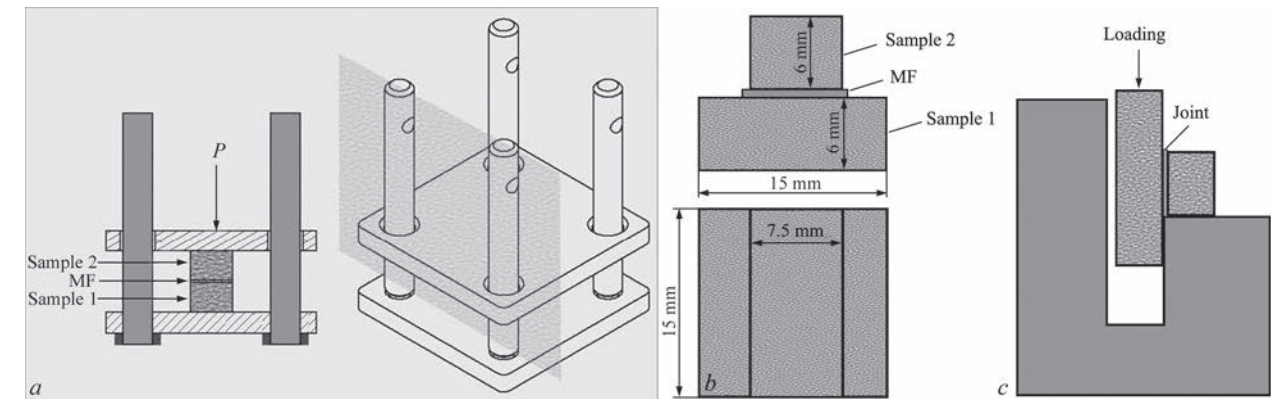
Schematic image of the fixture for conducting the bonding process (a), samples (b) and fixture for shear testing (c)
